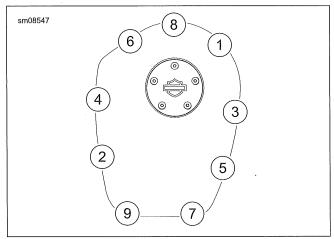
Cam Cover Tightening Sequence REMOVE
